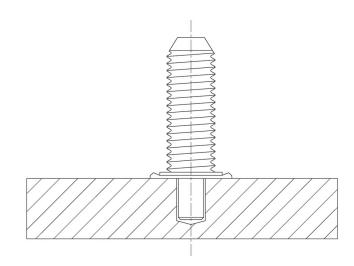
Example of a friction welded bolt with a predrilled hole
